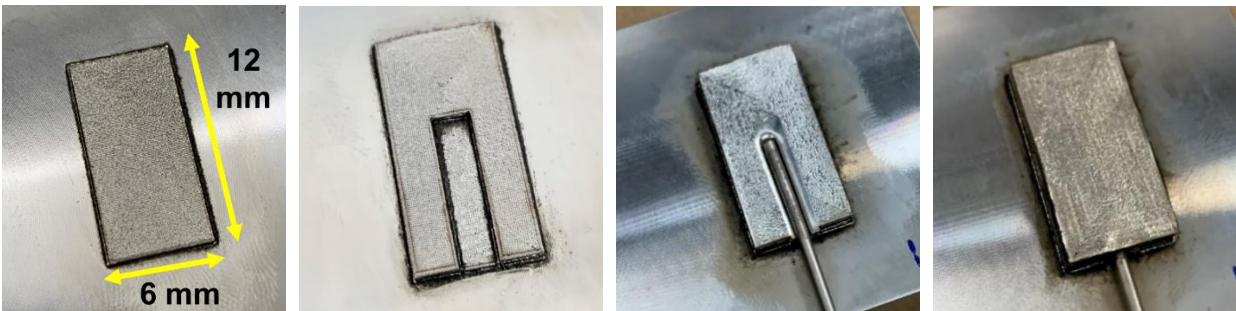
Weld-pad thermocouple embedding from left to right: printed base plate, grooved layers, welded pad after cutting, after printing another layer on top of the weld-pad.
